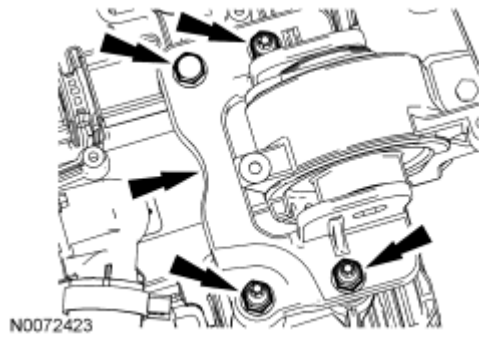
Identifying Bolt, Nuts And Mount Bracket
